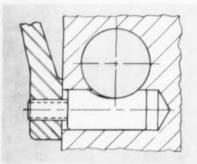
The clamp bolt here is similar to one in Fig. 19 but two-diameter and larger.
